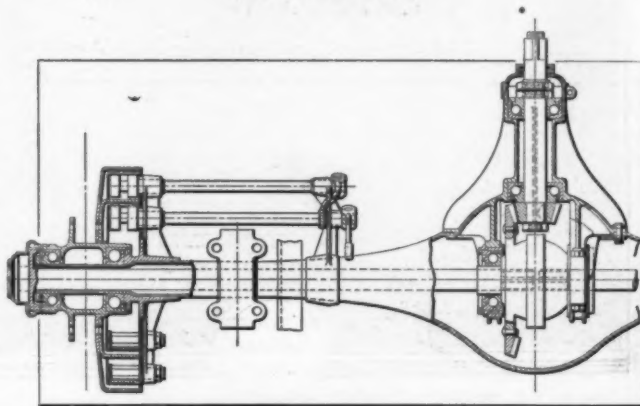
McCord full floating live rear axle with annular type ball bearings and parts of drop forged steel
